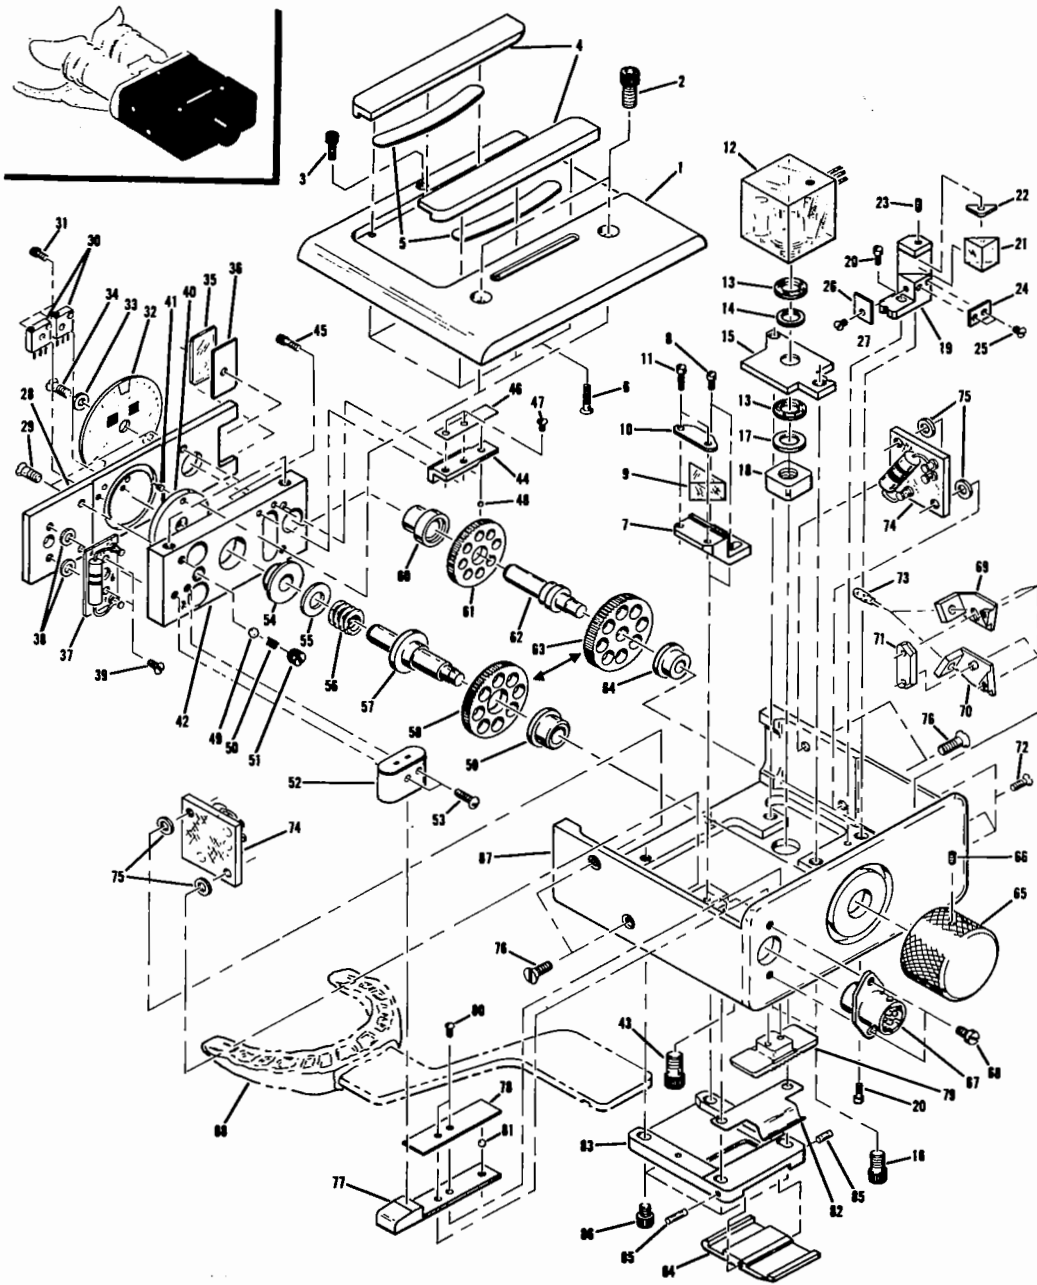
Inflight Vision Tester Presentation Disk Frame Assembly
